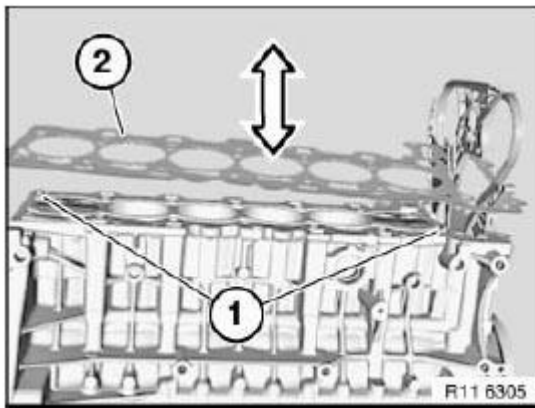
Checking Adapter Sleeves For Damage And Firm Seating
